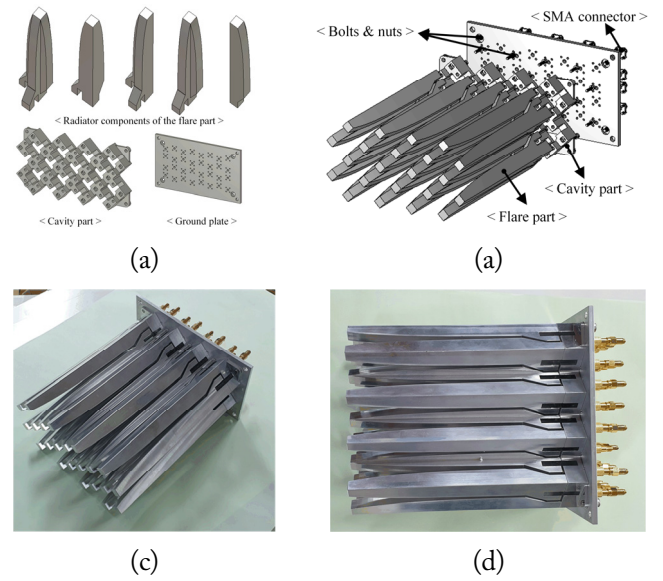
Photographs of the fabricated array antenna: (a) partial components of the antenna parts for fabrication and (b) assembly fabrication process, and (c) isometric view and (d) side view.
